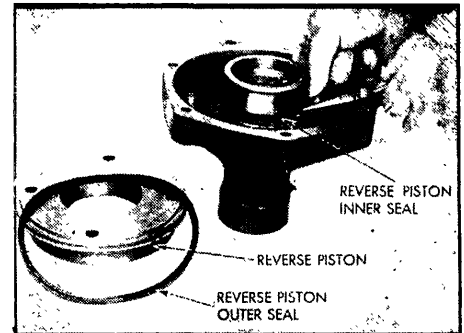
Removing reverse piston inner oil seal. 1951-52
